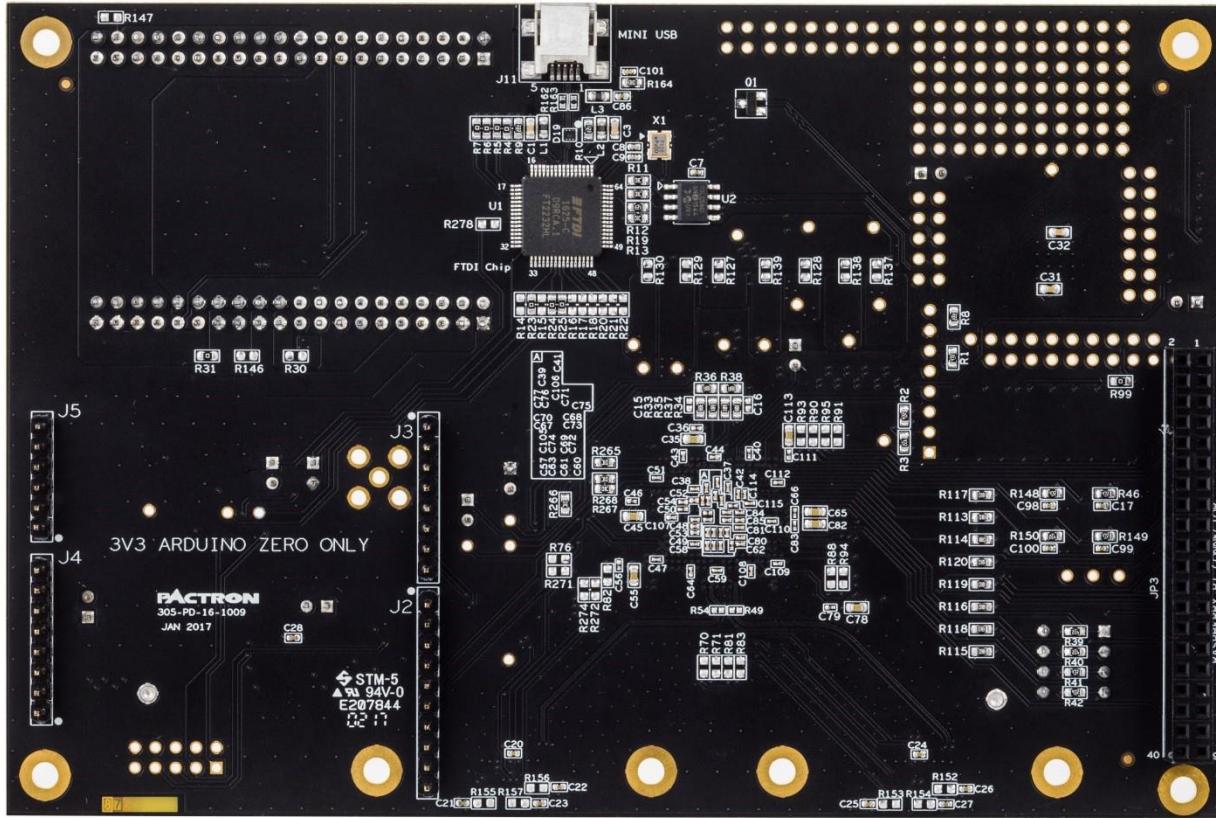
Bottom View of MachXO3-9400 Development Board
